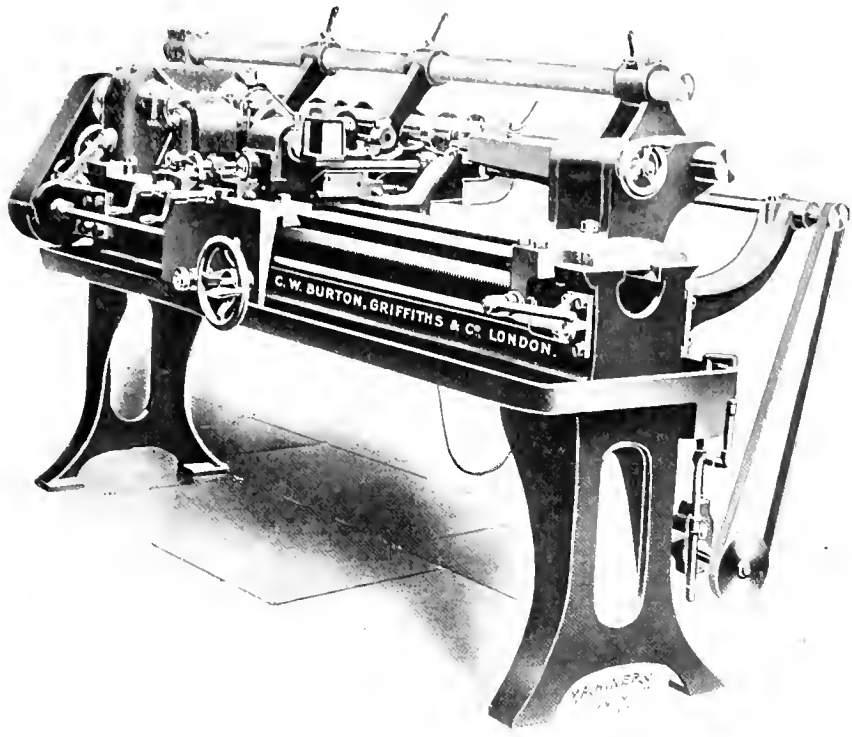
C. W. Burton-Griffiths & Co.'s Milling and Grinding Machine for Gas Engine Cam Shafts. Cutters and Emery Grinder controlled by Cam Shaft at Rear.
